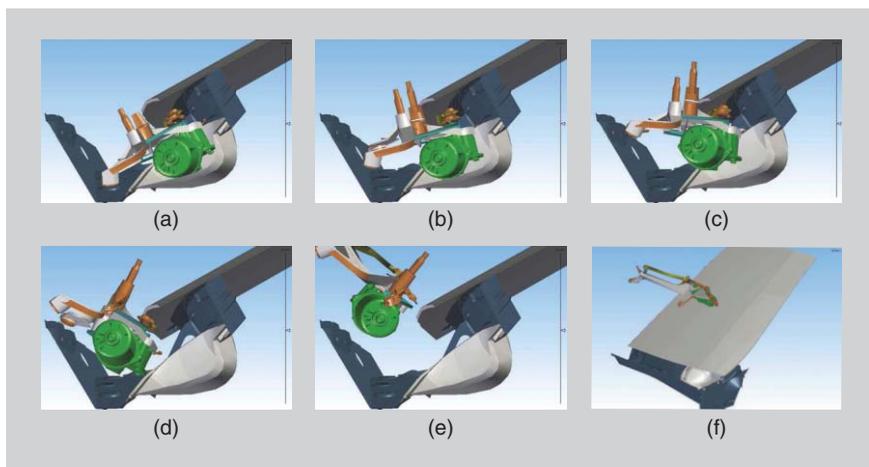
A 3-D automotive assembly task that involves inserting or removing a windshield wiper motor from a car body cavity. This problem was solved for clients using the path-planning software of Kineo CAM.
